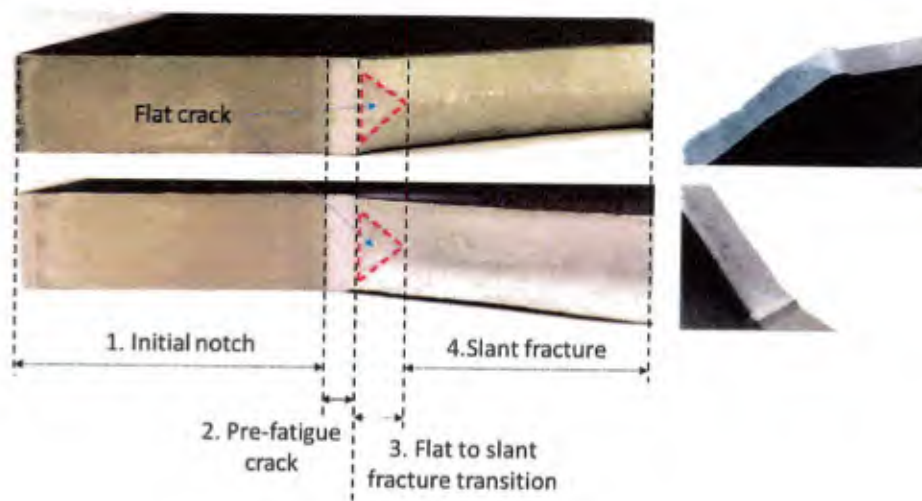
Fracture surface of the unrepaired specimen.
